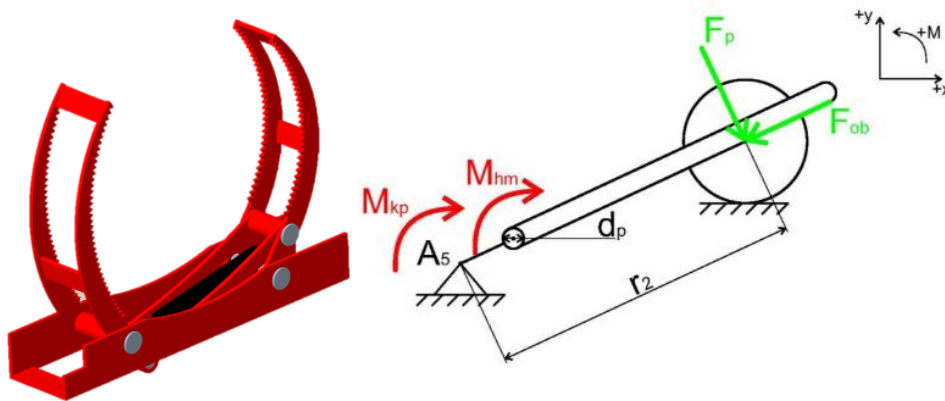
3D CAD model of the structural design of the clamping device (on the left) and schematic representation of the force conditions of the saw actuation and the chain drive during log cutting (on the right)
